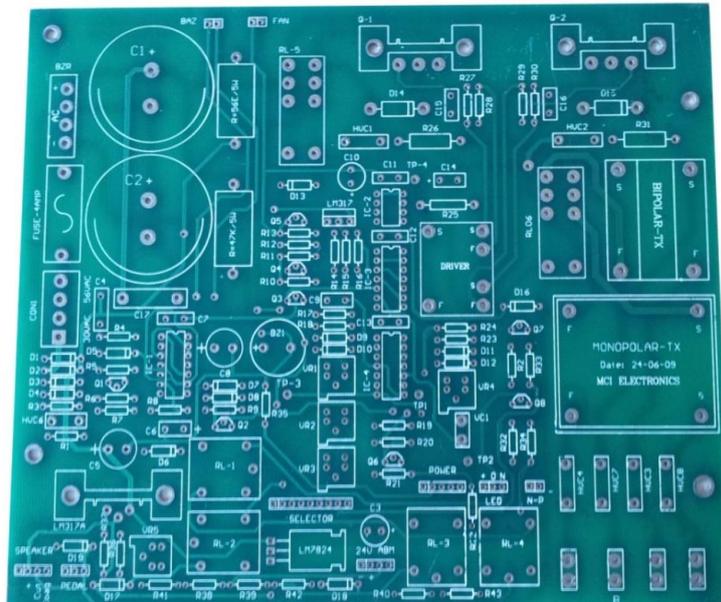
Top Side of Electro Surgical Diathermy PCB
